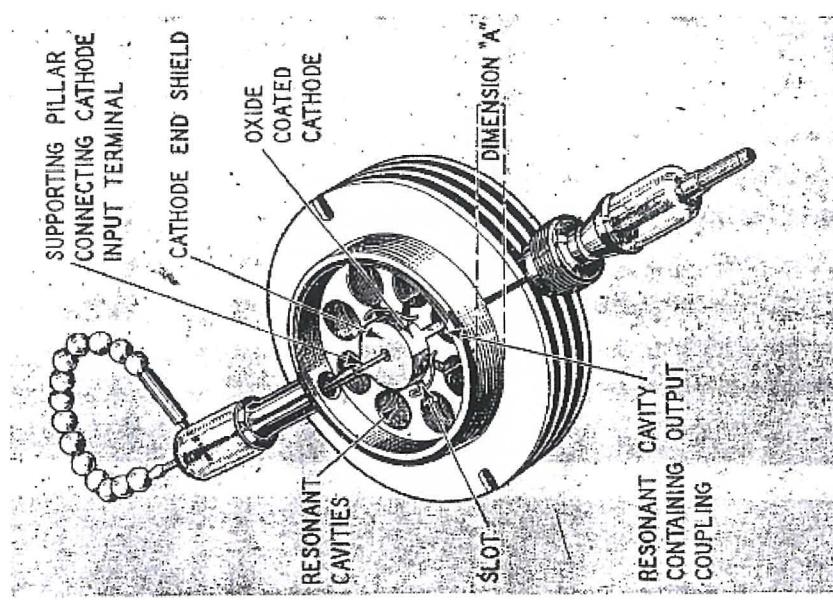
CATHODE ASSEMBLY OF A MODERN MAGNETRON (END BLOCKS REMOVED). [Reproduced by courtesy of the Admiralty.]
